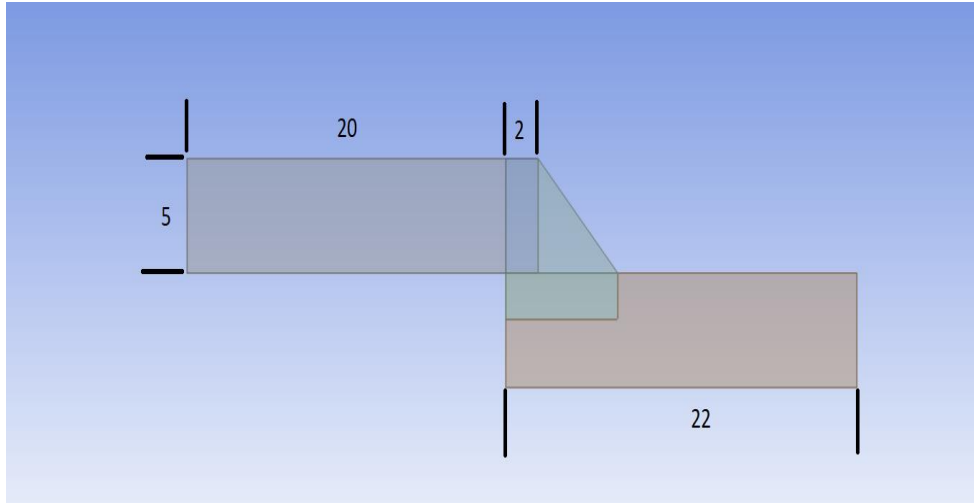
Typical geometry of transverse fillet lap weld joint, dimensions in mm
